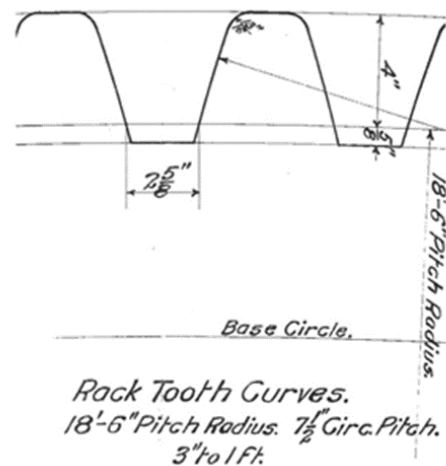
As-designed rack tooth taken from the original mechanical design drawings.
